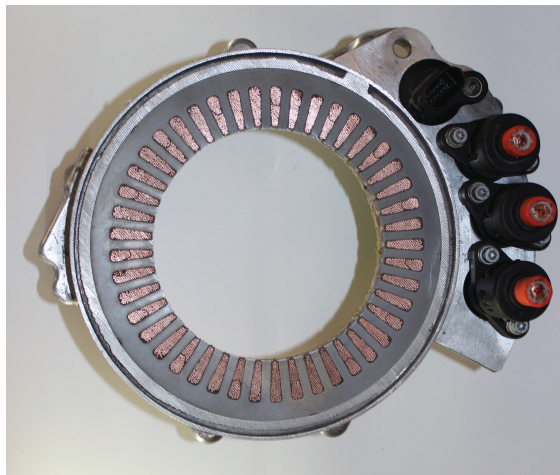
Stator geometry of the used machine including windings. To the right, the three-phase winding connection is seen.
